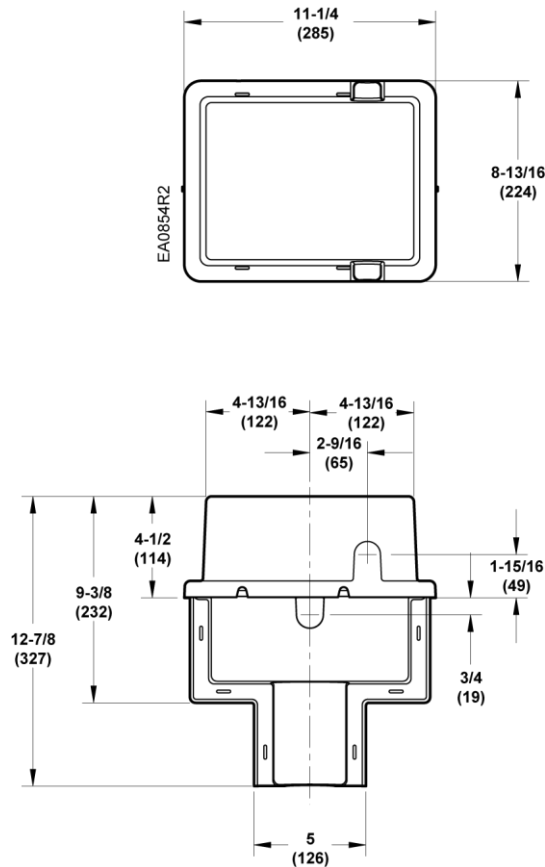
Dimensions of 599-10071 Weather Shield in Inches (Millimeters).
